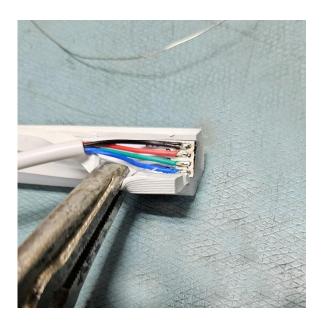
Hold the wire ends and solder in place so that they are not in contact with each other
